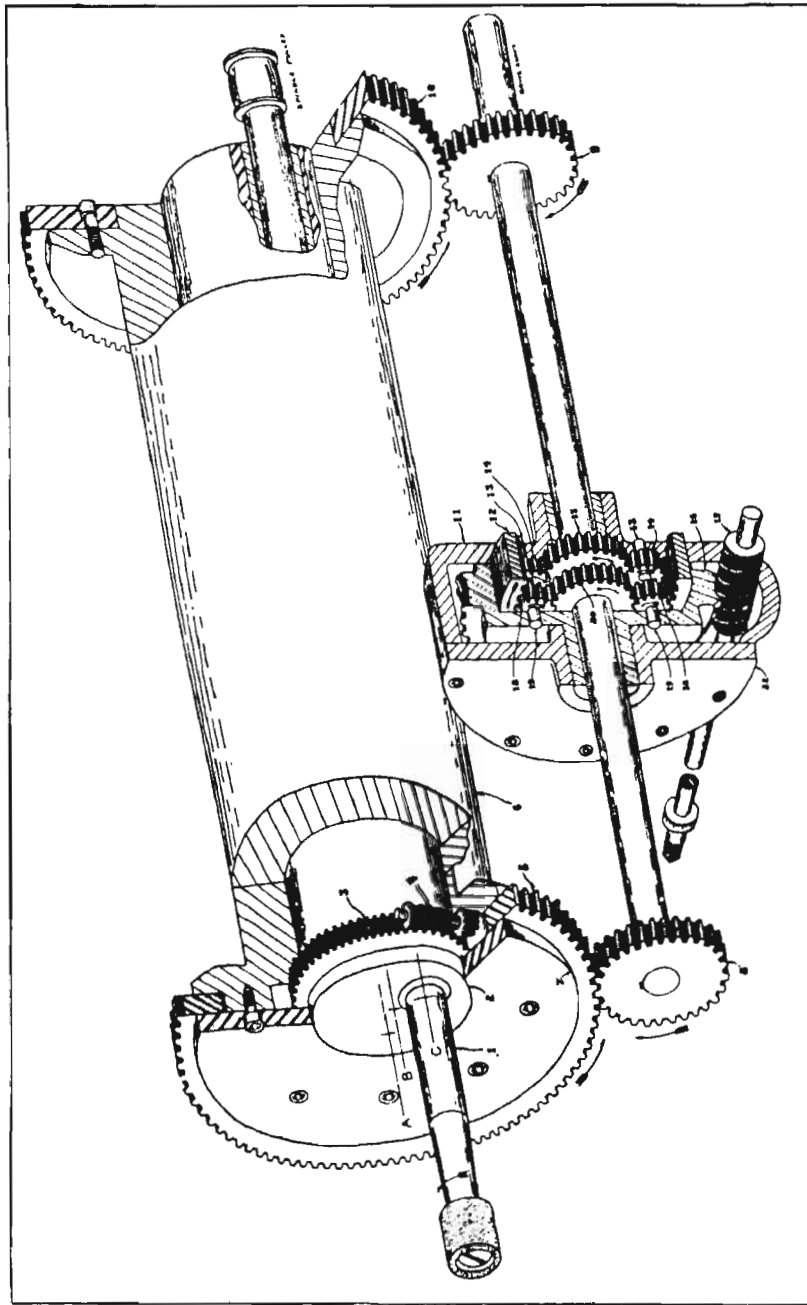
Perspective View of Eccentric Feed Mechanism which is Operated by the Adjustment of Differential Gearing
